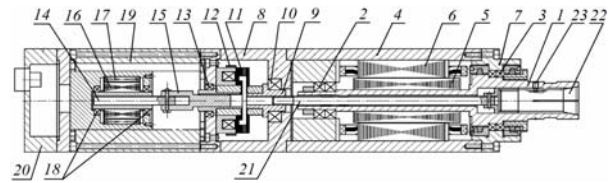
The spindle unit of the machine tool for the patent of Ukraine No. 116050.
